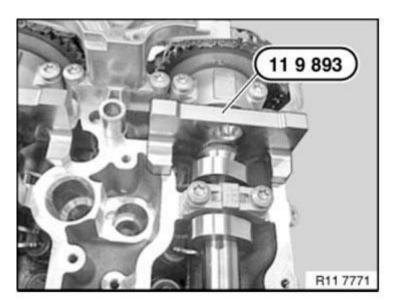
Fitting Special Tool 11 9 893 On Intake Camshaft
